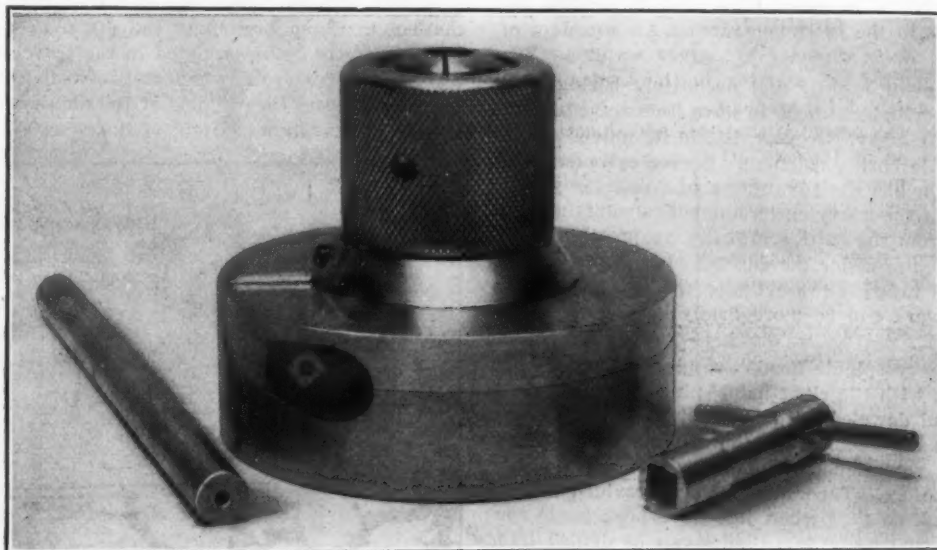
The Jarvis Drawing-In Chuck, for Use on Lathes, Millers, Grinders, &c.
